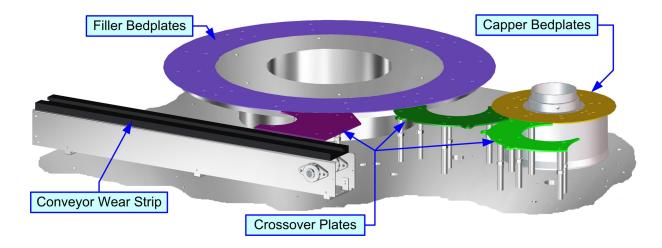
, Crossover Plates, Bedplates, & Wear Strips
